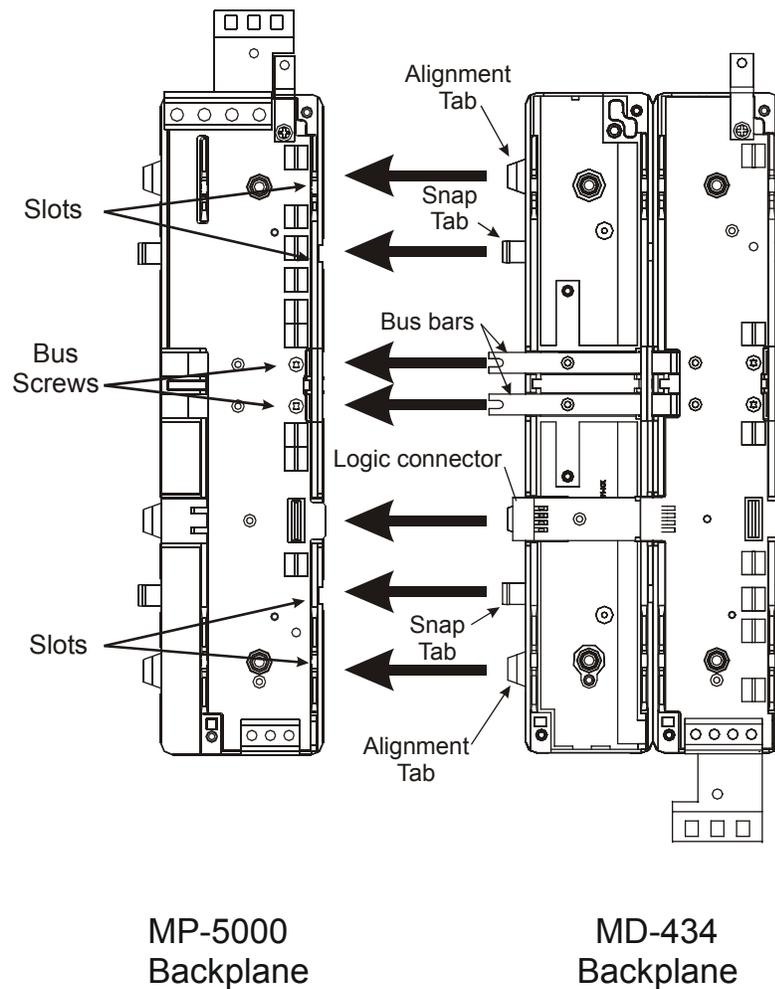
Assembling the Drive Module Backplane to the Power Module Backplane.
